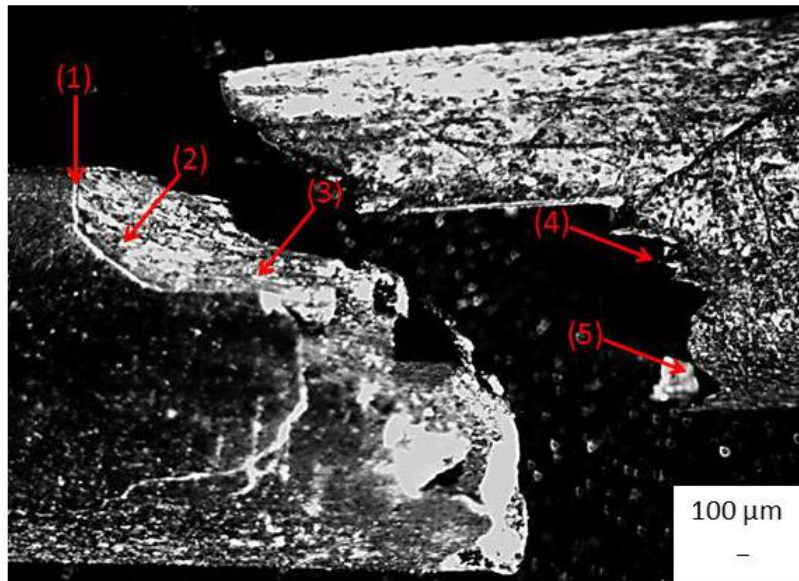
Fracture with both sides of the failed wire aligned to show pattern
